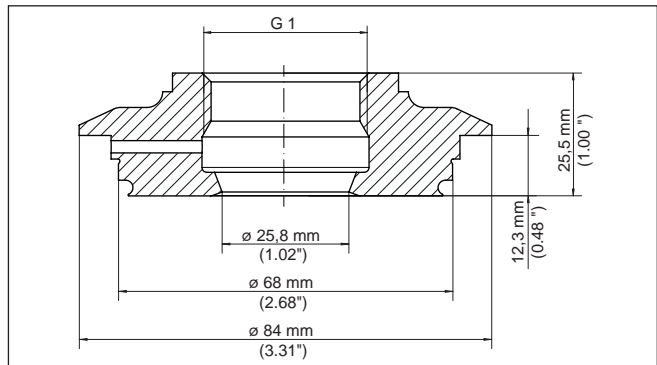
Dimensions hygienic adapter G1 (DIN 3852-X) on Varivent Form N DN 40 ... DN 100 - Cone seal
